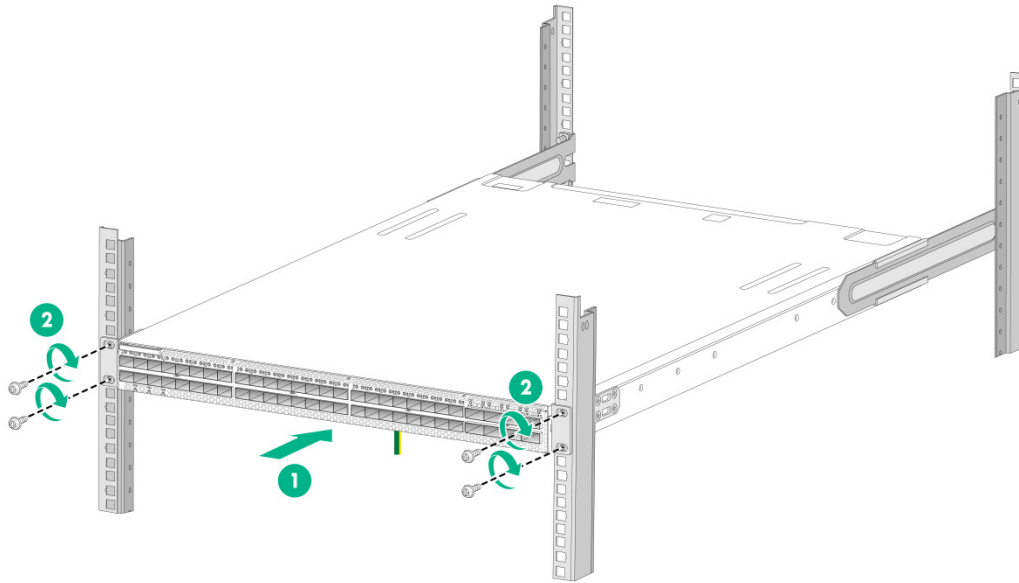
Mounting an S9855-24B8D switch in the rack (mounting brackets installed at the port side)
